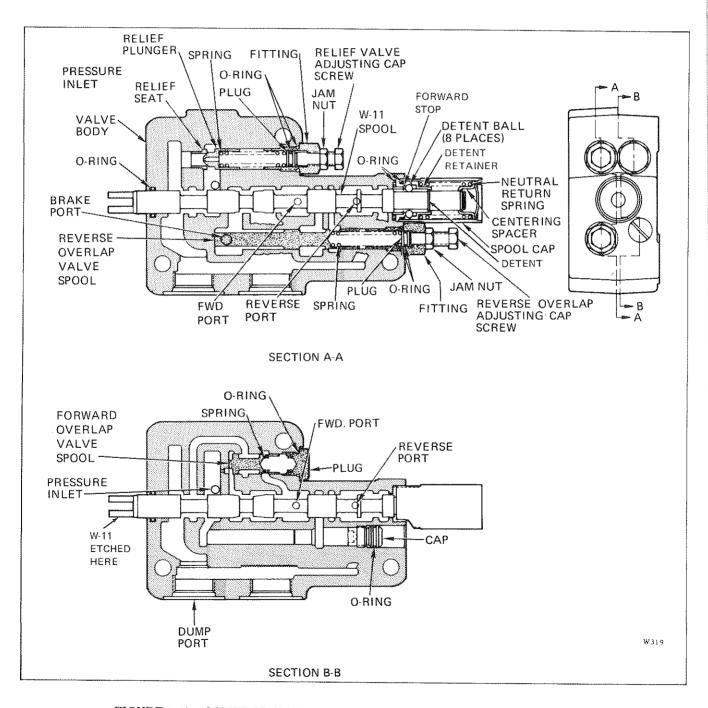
CONTROL VALVE ASSEMBLY, POWER CONTROLLED WINCH
